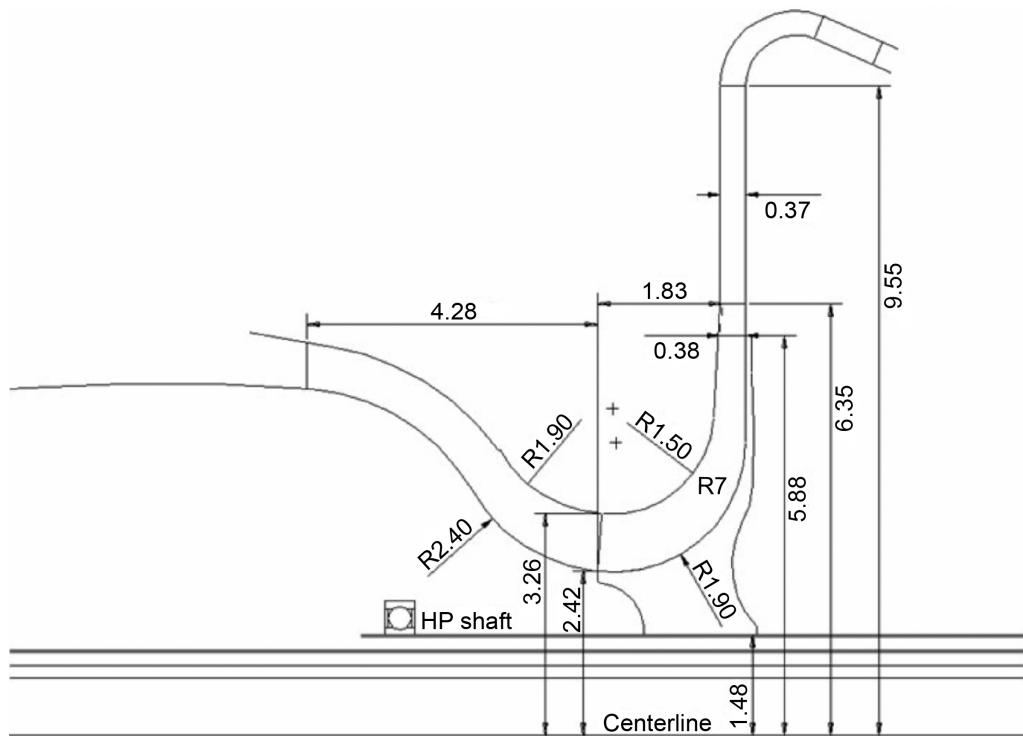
Flow path for single-stage centrifugal high-pressure (HP) compressor of the Large Civil Transport Rotor Engine, option 2 (Ref. 12).
